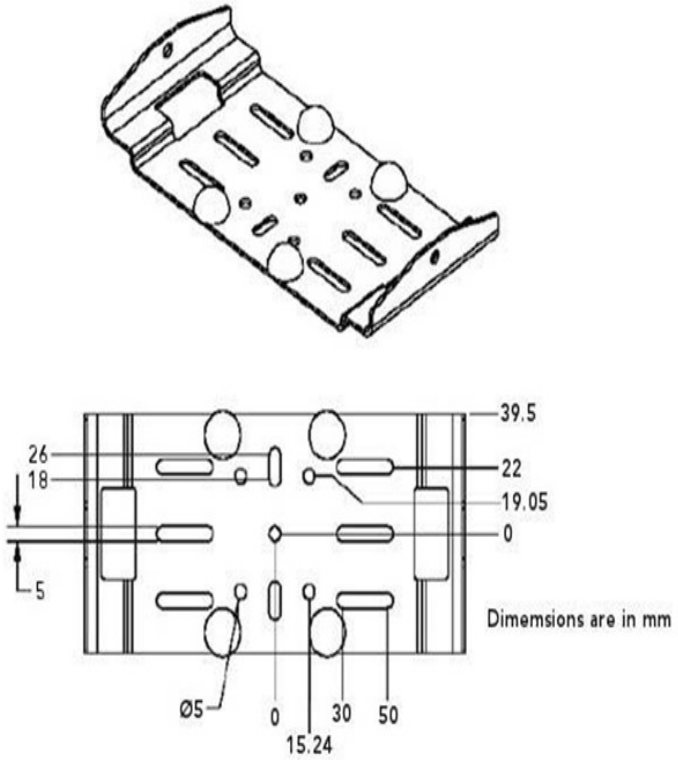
Transceiver Unit Mounting Bracket Dimensions
